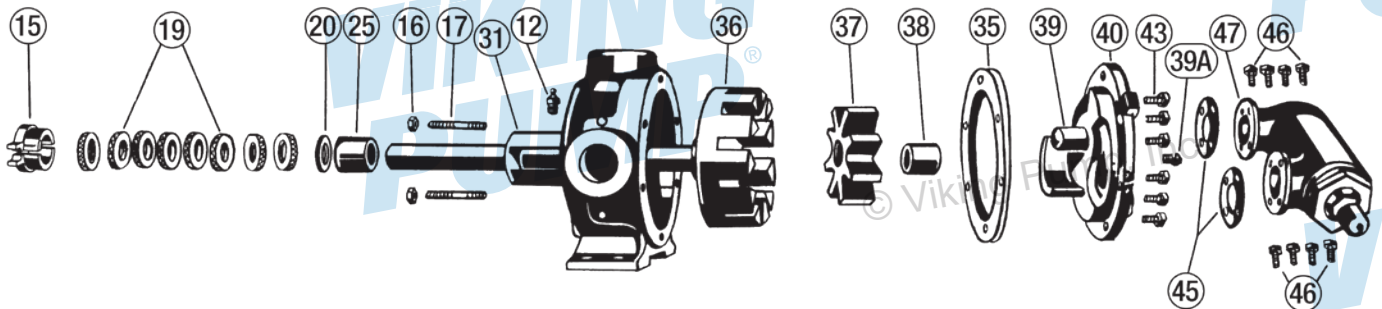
EXPLODED VIEW FOR SIZES H, HL - 32 SERIES™ & 432 SERIES™
